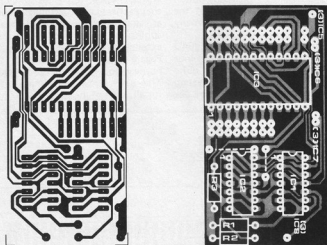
Printed circuit board and component layout for the extension circuit given in figure 10.
